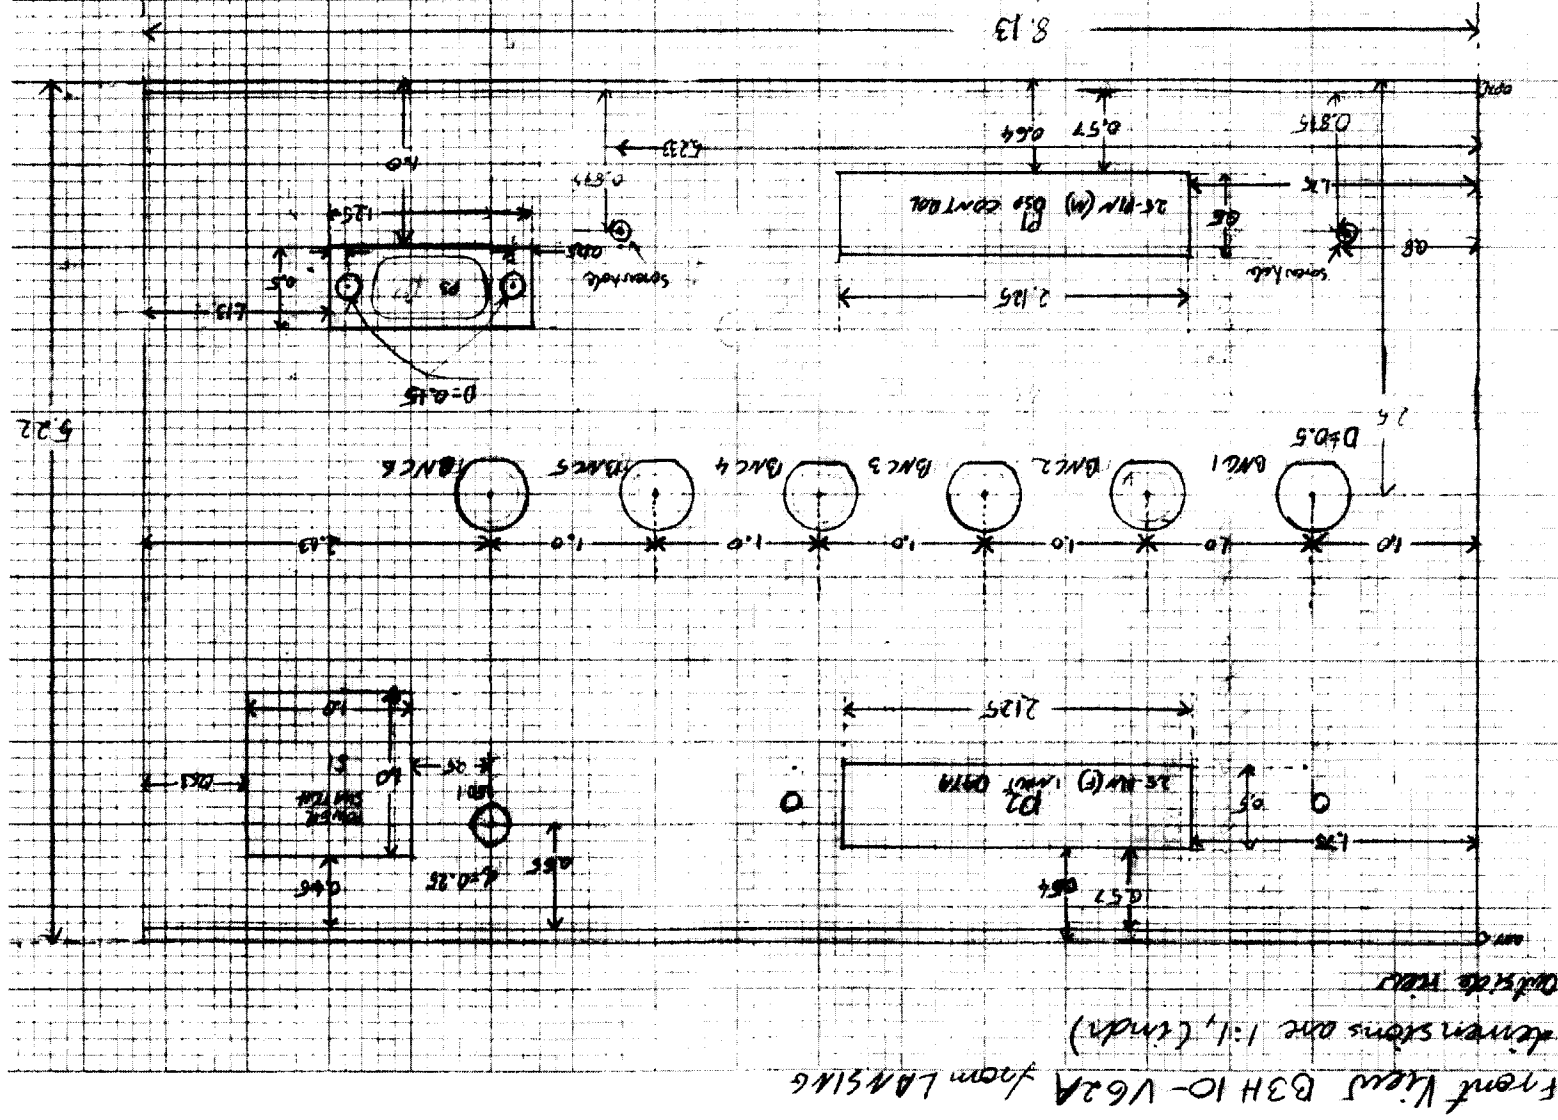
6: Bottom View of the Enclosure B3H10-V62A
